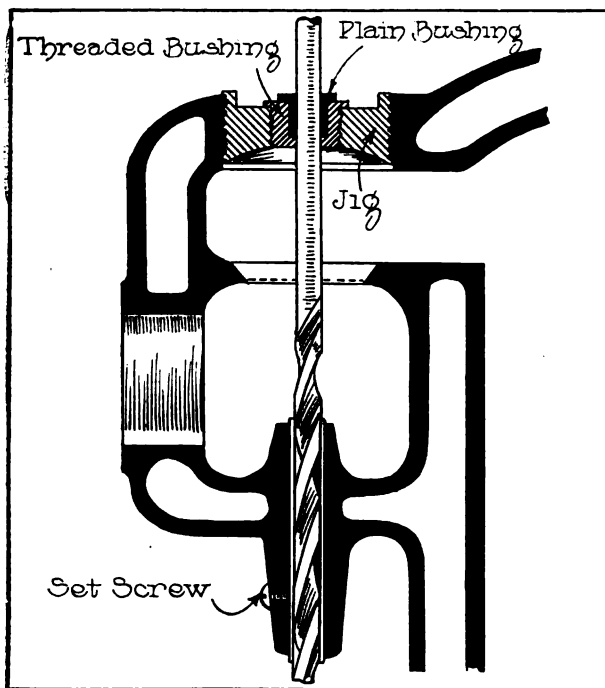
Suggestion for Rebushing Worn Valve Guides with Standard Steel Tubing.
